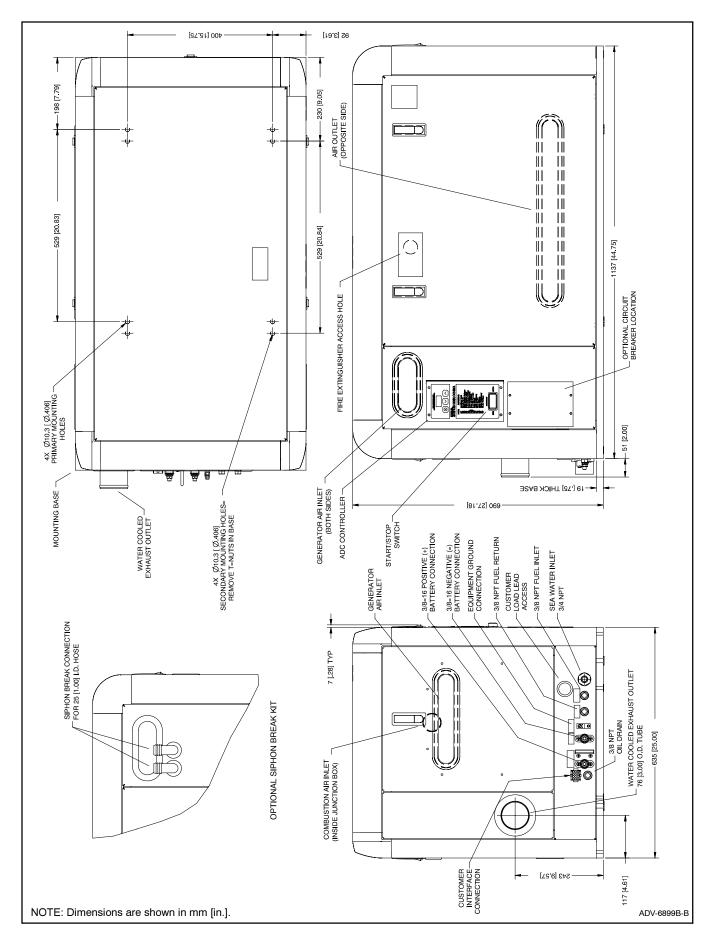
Dimension Drawing, 23/24EOZD and 20EFOZD with Sound Shield
